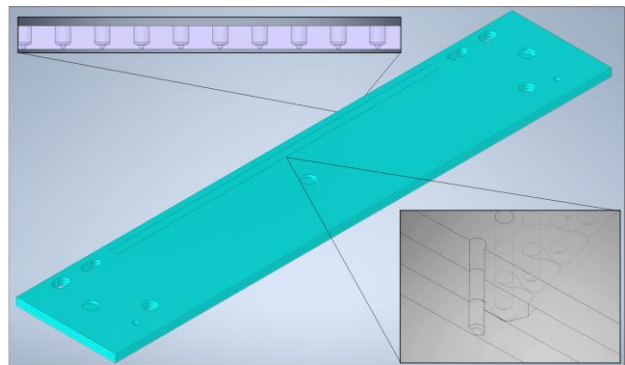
Fused silica printhead nozzle plate (Source: Courtesy of iPrint).
